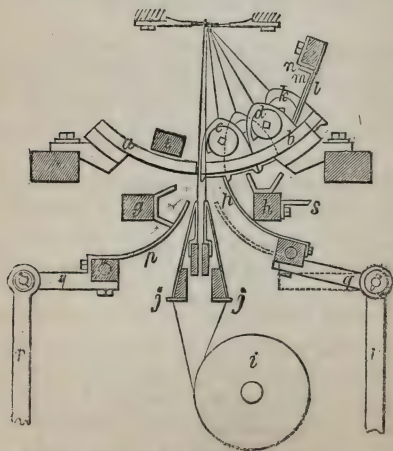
Croft's Machine for Bobbin-net Breadths with Selvages.
